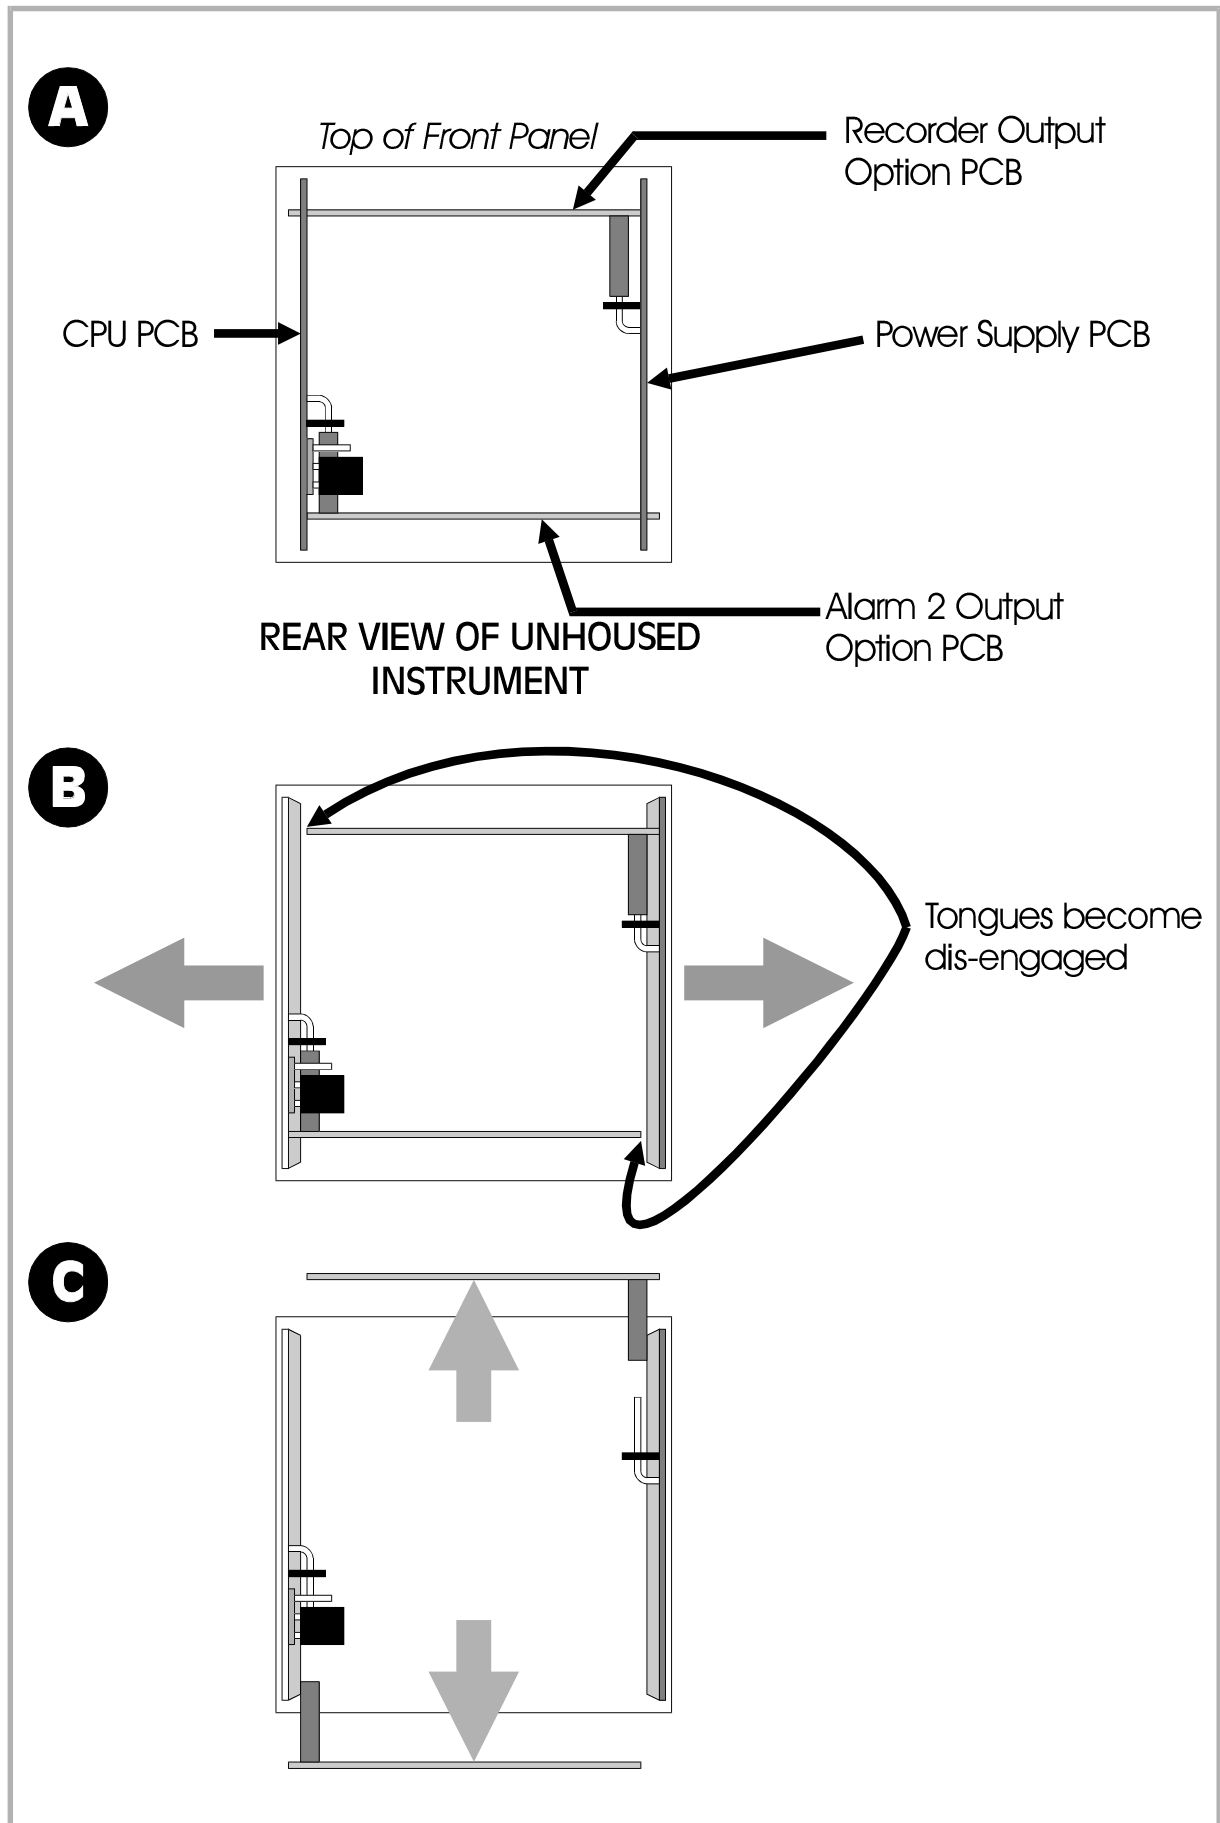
Removing the Alarm 2 Output/Recorder Output Option PCB
